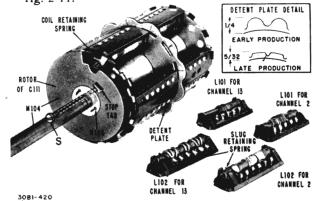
94C8-2. Tuner Turret, Showing Snap-in Coils.
